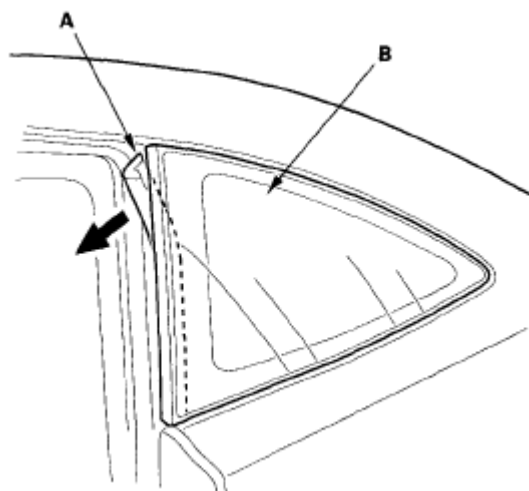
Removing Front Seal From Front Edge Of Quarter Glass
